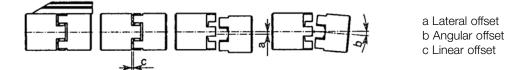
Measuring points for tolerances of the coupling alignment
